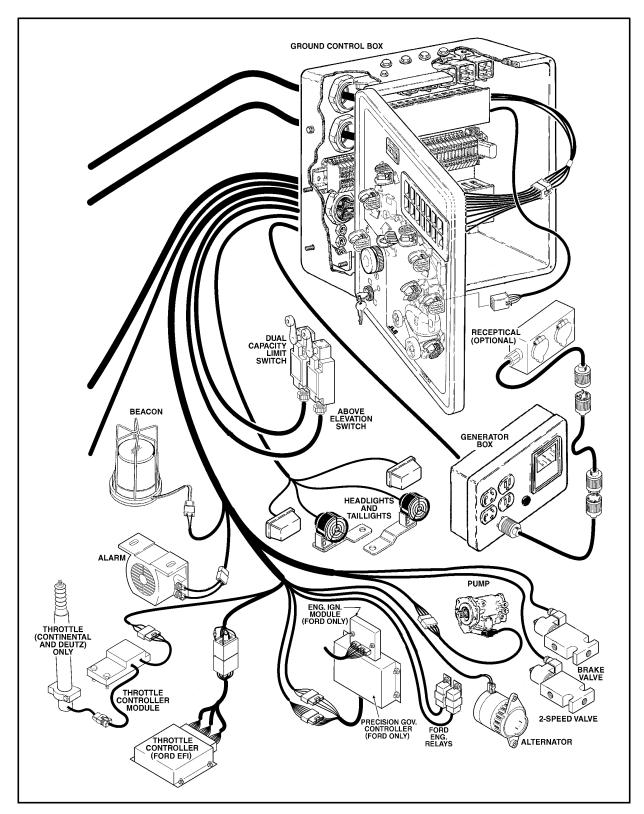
Electrical Components Installation (Prior to S/N 62137)- Sheet 2 of 2
